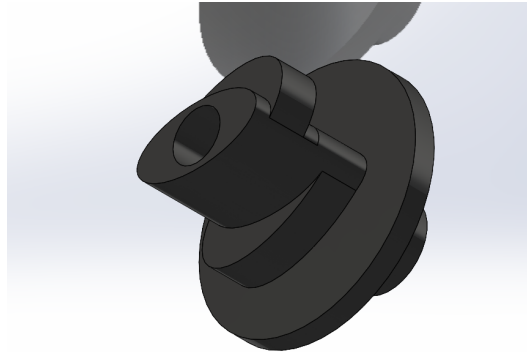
Design of a single lever which is used to brake the wheels.
